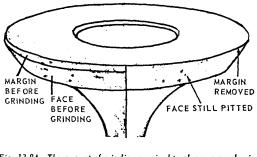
A. The amount of grinding required to clean up a valve in this condition will remove the margin and render the valve useless.
